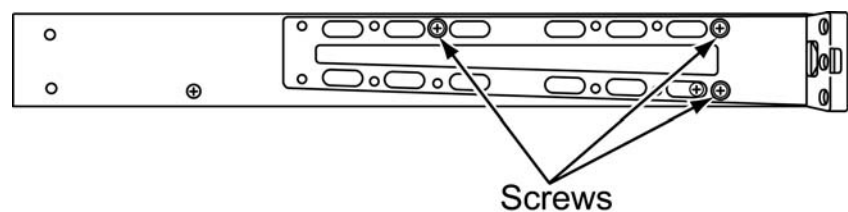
Rack Mount Bracket Installed 19" CHS1U-AU Chassis
